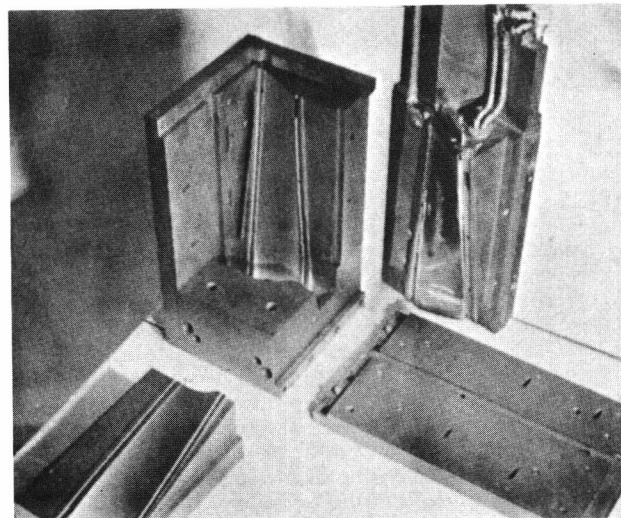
Main parts of the pressing tool for the twin blade fabrication
